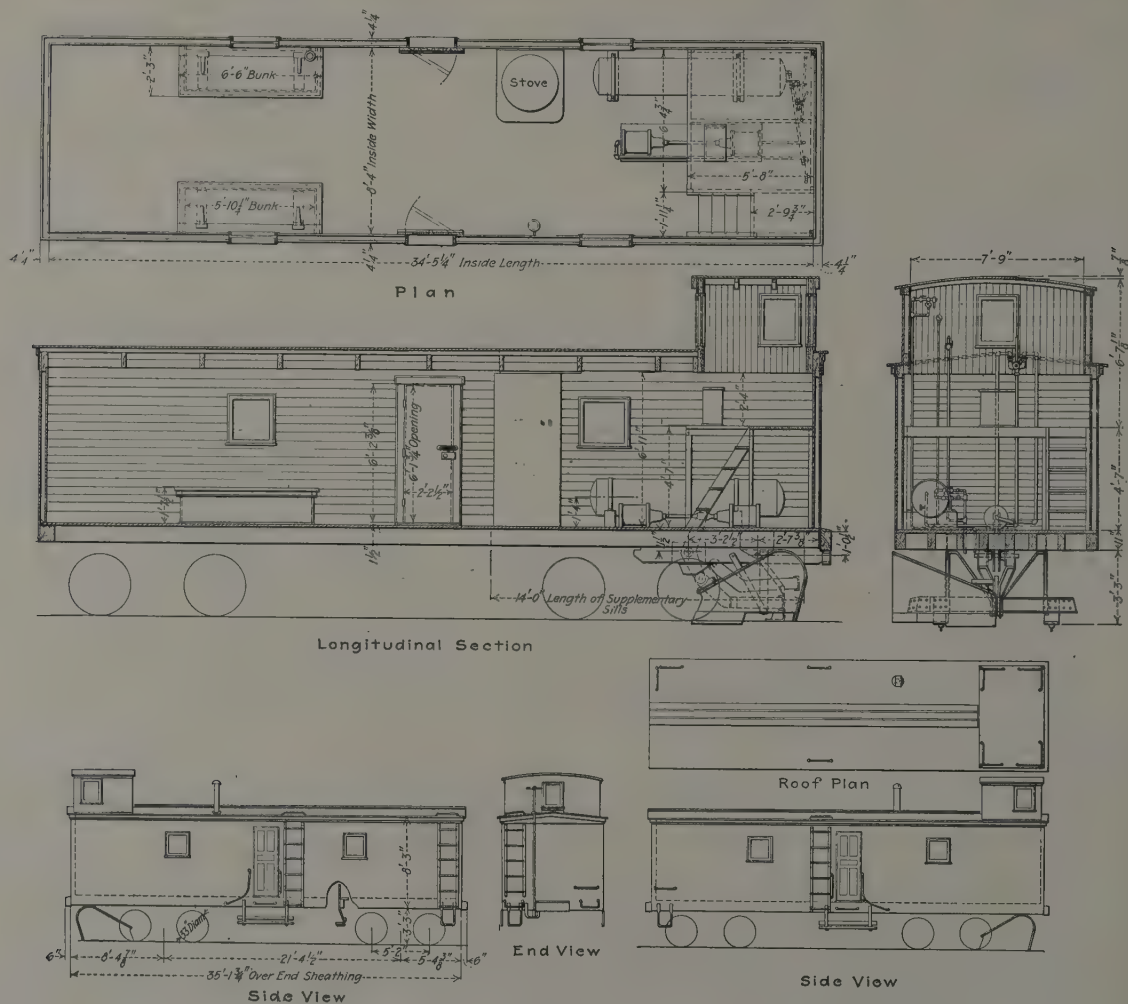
General Arrangement of Snow Flanger Car. Canadian Government Railways.
